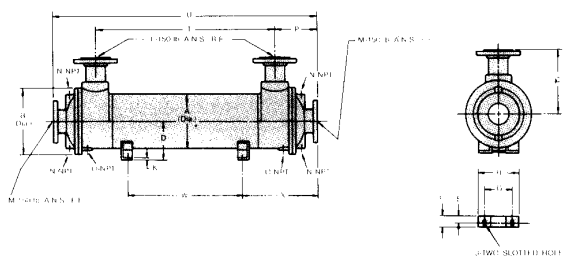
10" & 12" DIAMETER, SINGLE-PASS
